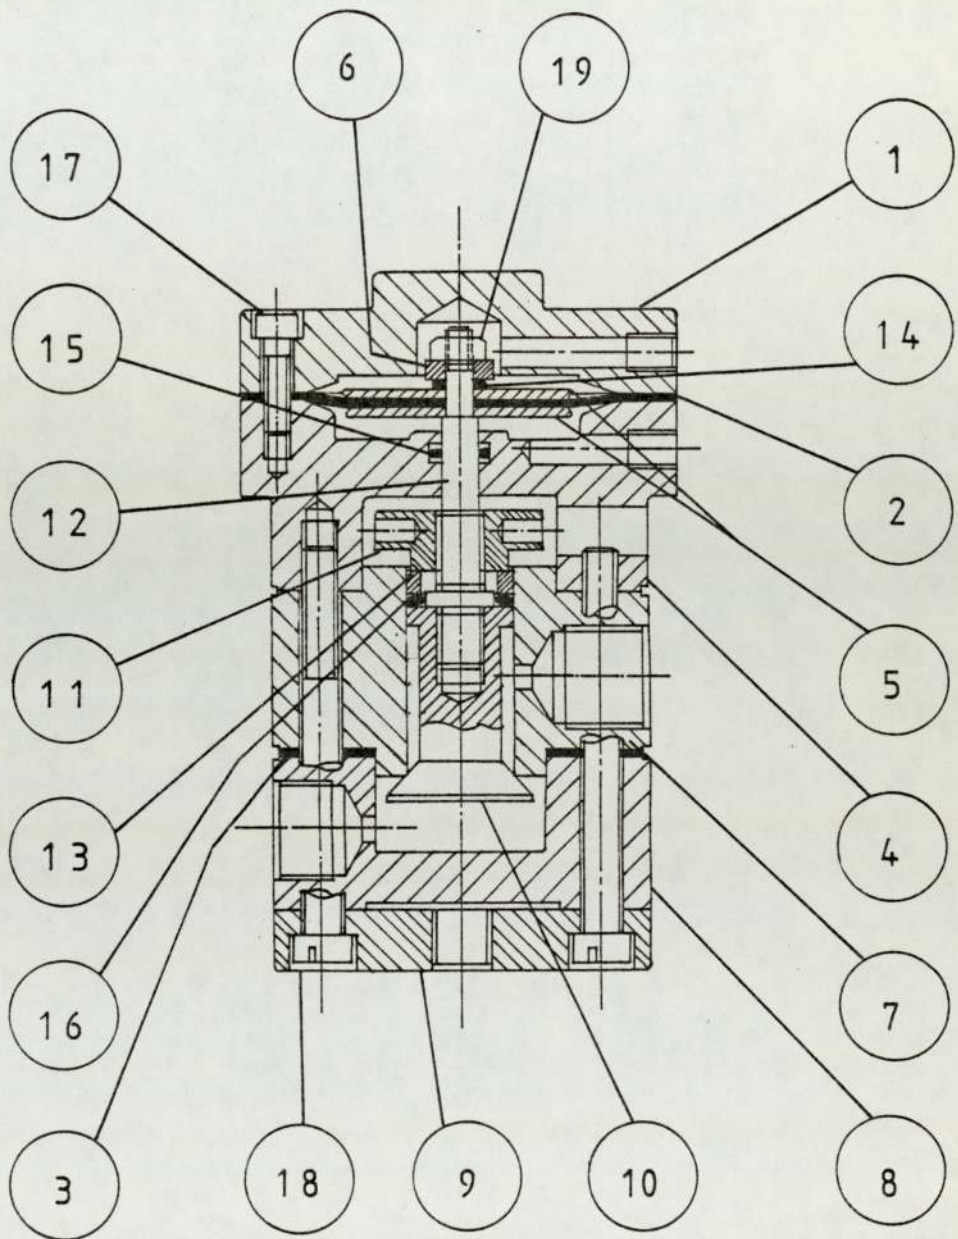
Parts of The Pneumatic Poppet Valve
